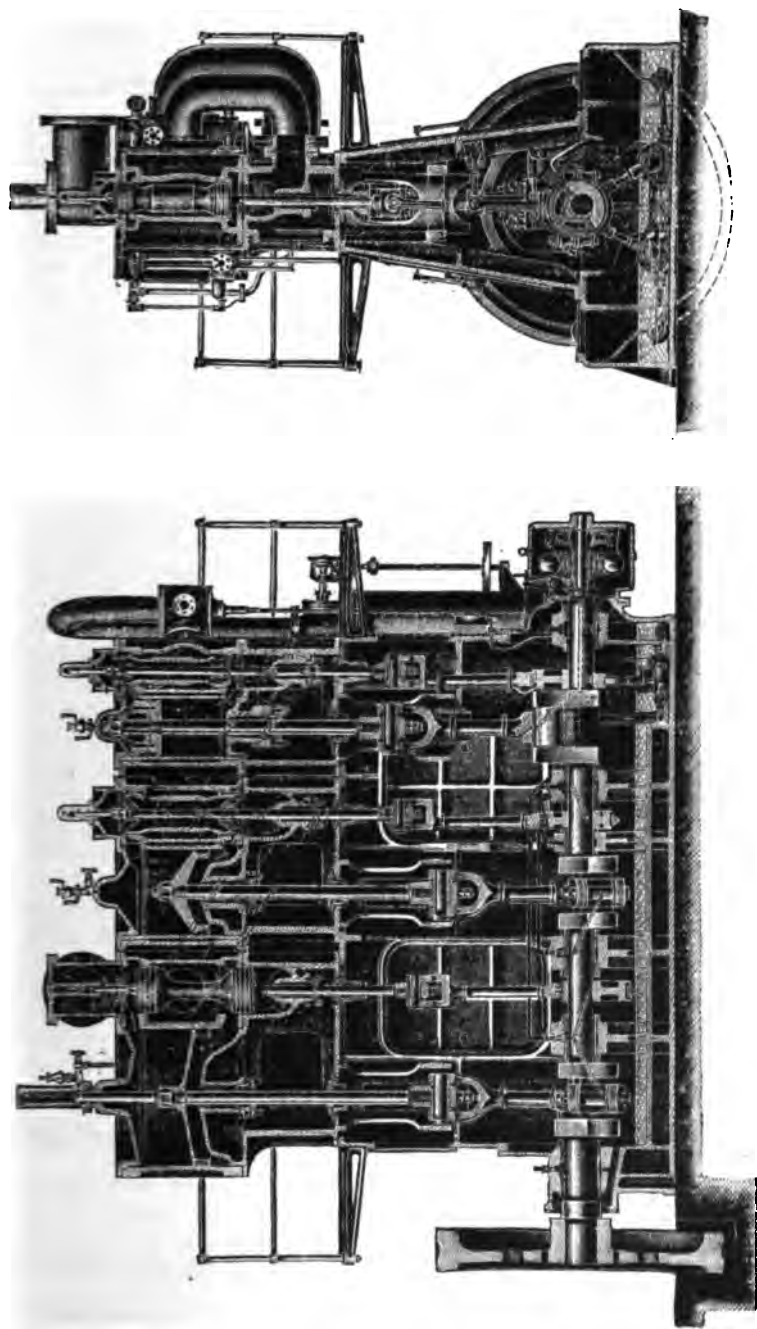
Sections of Triple Expansion Belliss Engine.
